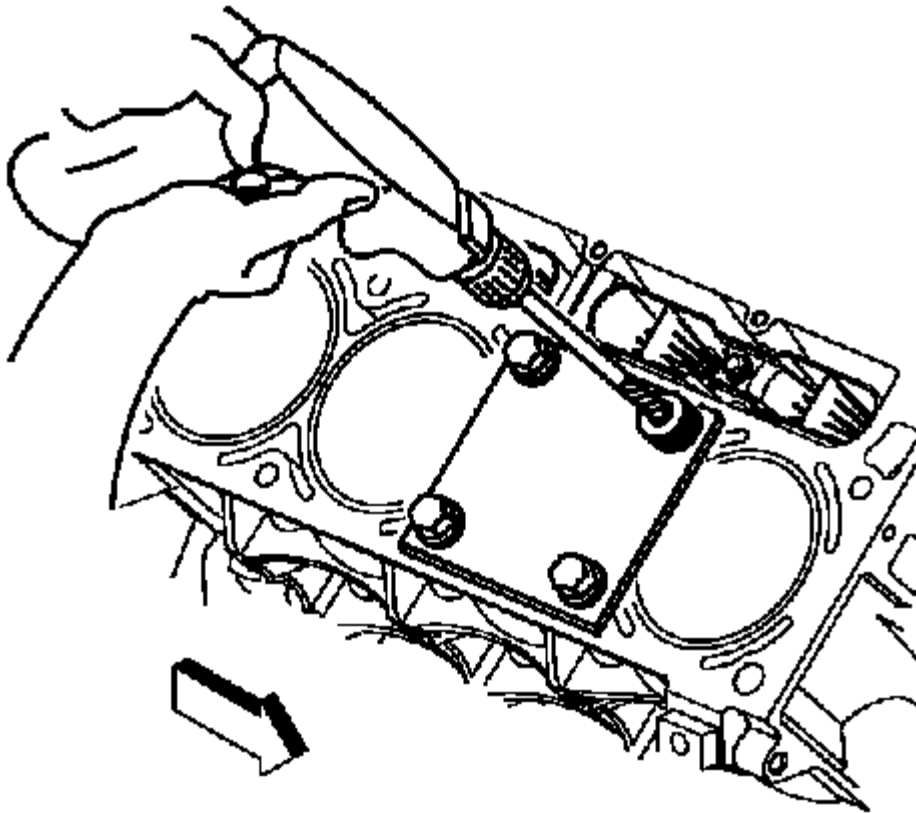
View Of Alignment Pin & Fixture Retaining Bolts
